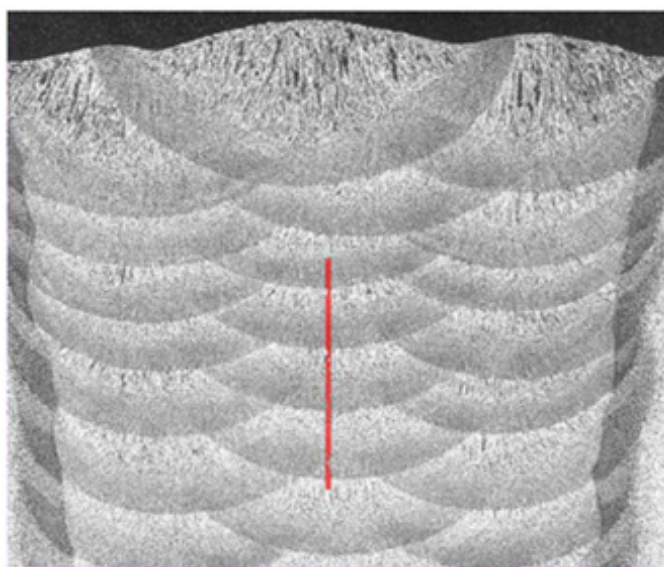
Cross-section of a typical test weldment with three beads per layer [11].
